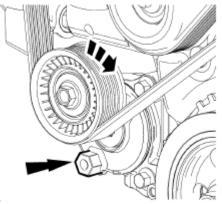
Locating Accessory Drive Belt Tensioner Bolts Courtesy of FORD MOTOR CO.
